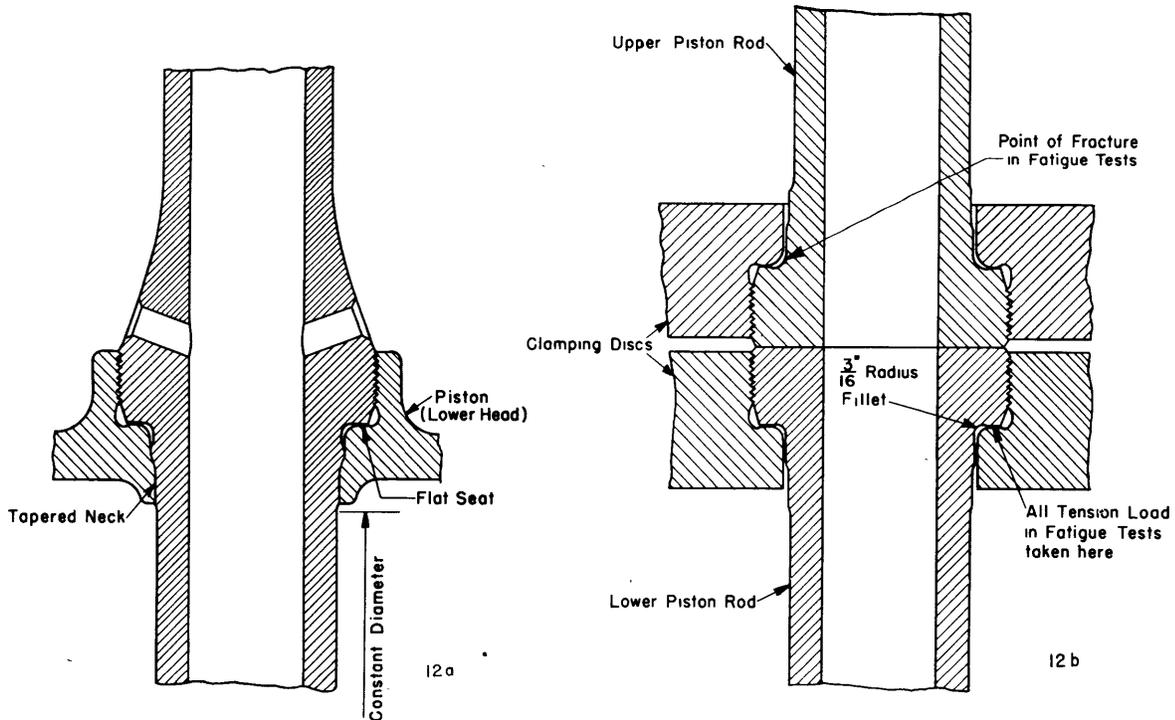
Methods of Clamping Piston End of Rod in Engine and in Test
